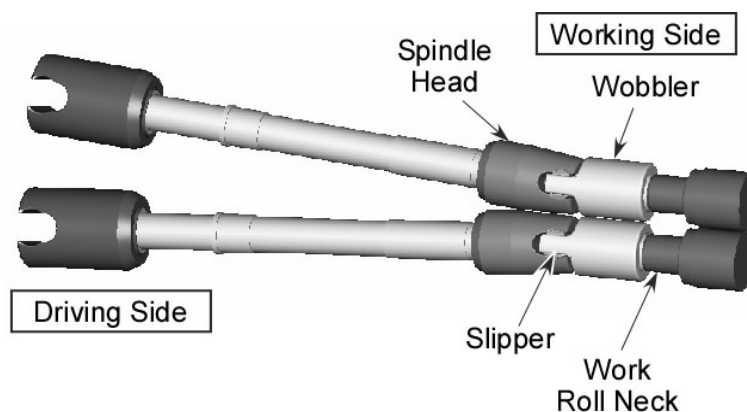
Schematic drawing of a wobbler connecting the driving shaft with the roll.
